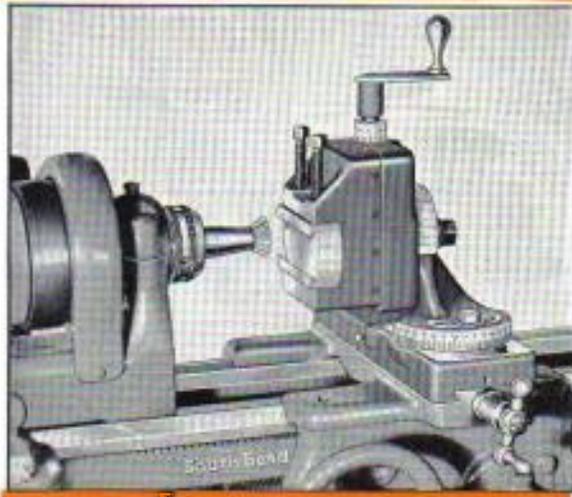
Milling a Dovetail on the 9" Workshop South Bend Lathe Using the Milling Attachment.
